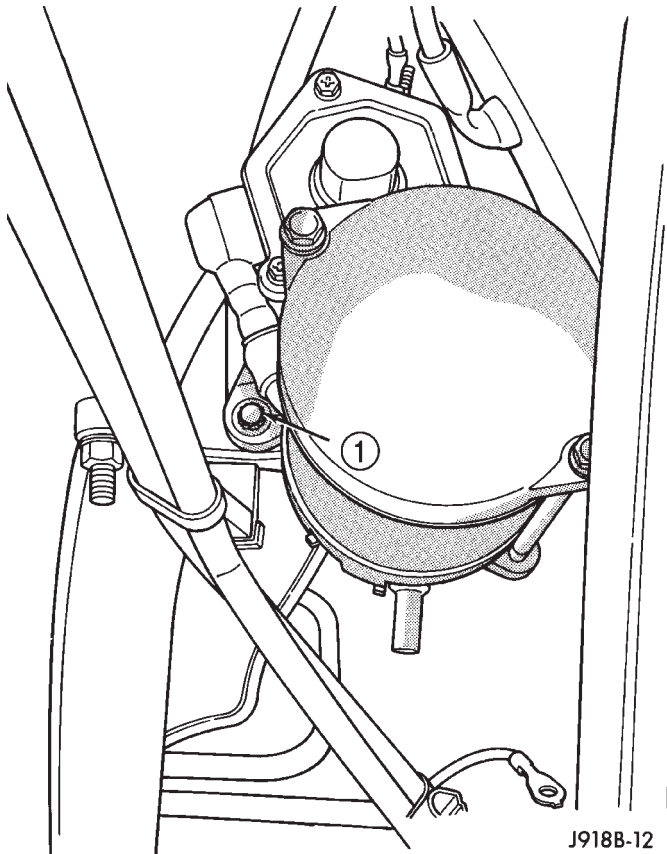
Starter Motor Remove/Install - 5.9L Diesel Engine
